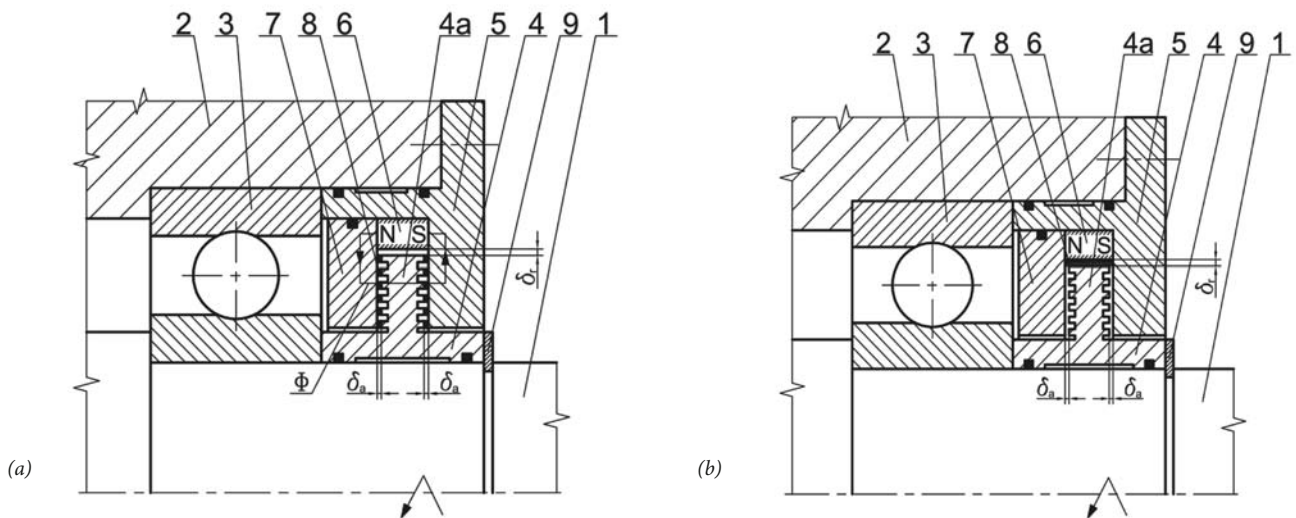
Hybrid protective seal with magnetic fluid for rolling bearing (a) position of magnetic fluid at low rotating speed, (b) position of magnetic fluid at high rotating speed 1 – shaft, 2 – housing, 3 – rolling bearing, 4 – flanged sleeve, 4a – flange, 5 – cover, 6 – permanent magnet, 7 – pole piece, 8 – magnetic fluid, 9 – snap ring, δ_a – axial sealing gap, δ_r – radial sealing gap, Φ – closed magnetic circuit
